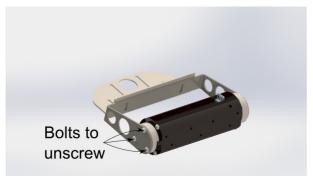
The last bolts that need to be unscrewed are the ones in the drive wheel
